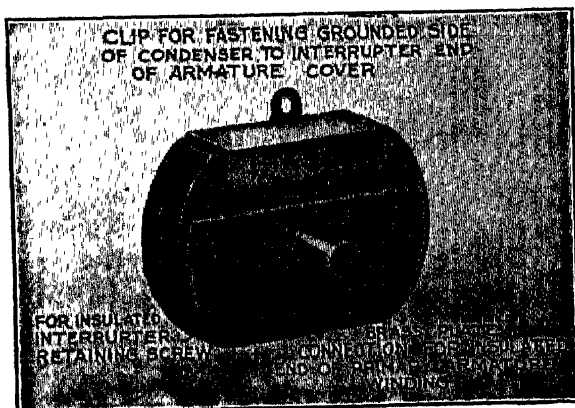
Condenser of Bosch DU4 high-tension magneto.
